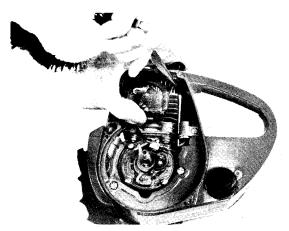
Removing Retaining Ring from Manual Oiler Button
